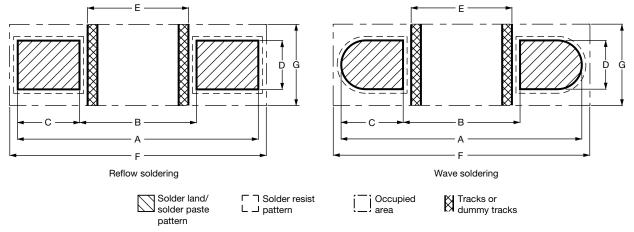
Recommended pad dimensions for reflow and wave soldering
